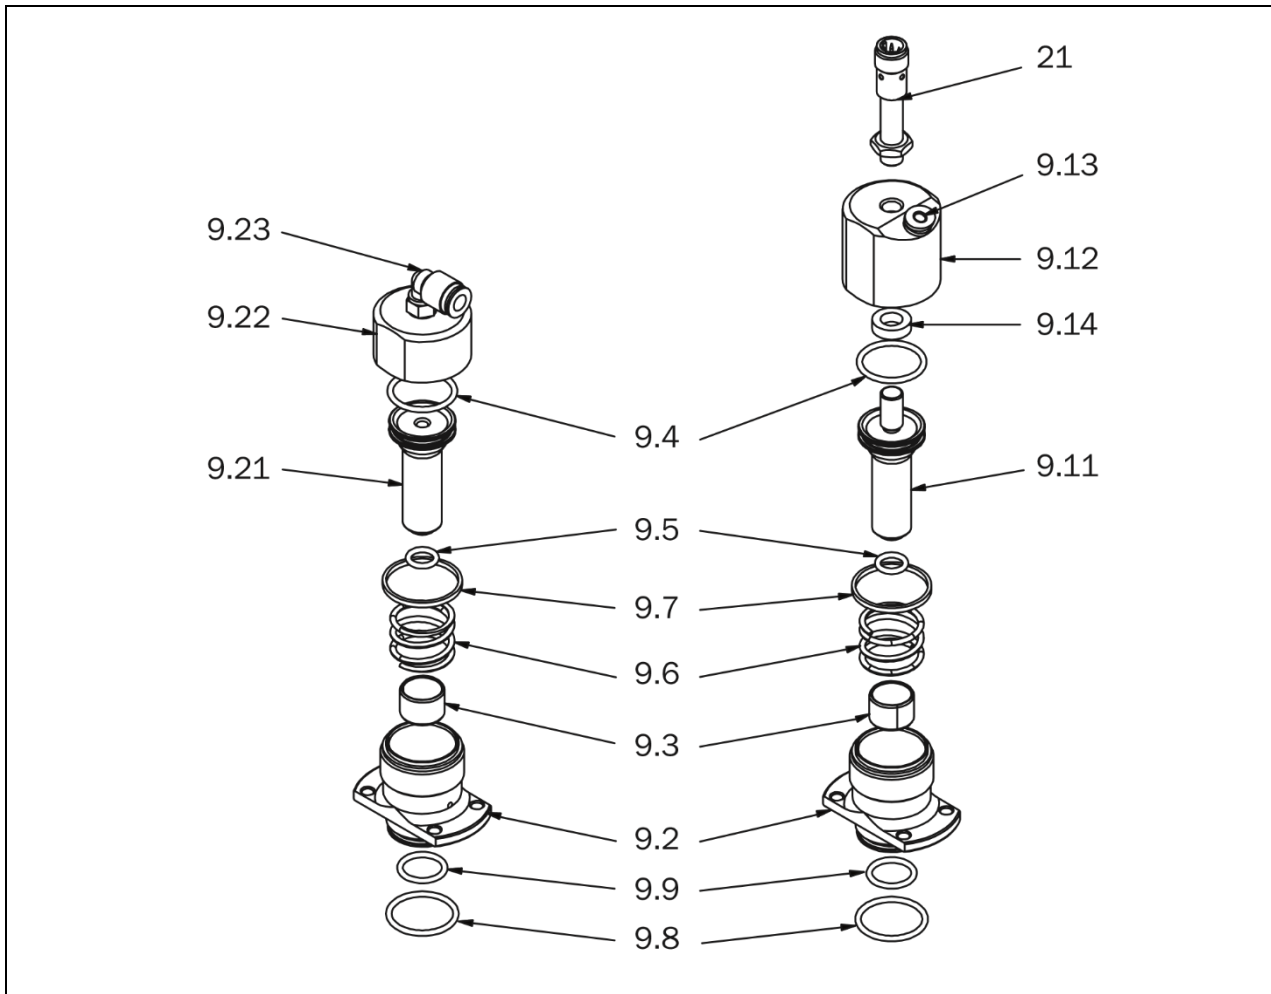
Structure of pneumatically actuated auxiliary valve
